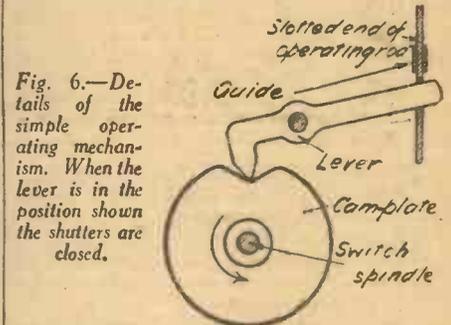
Details of the simple operating mechanism. When the lever is in the position shown the shutters are closed.
